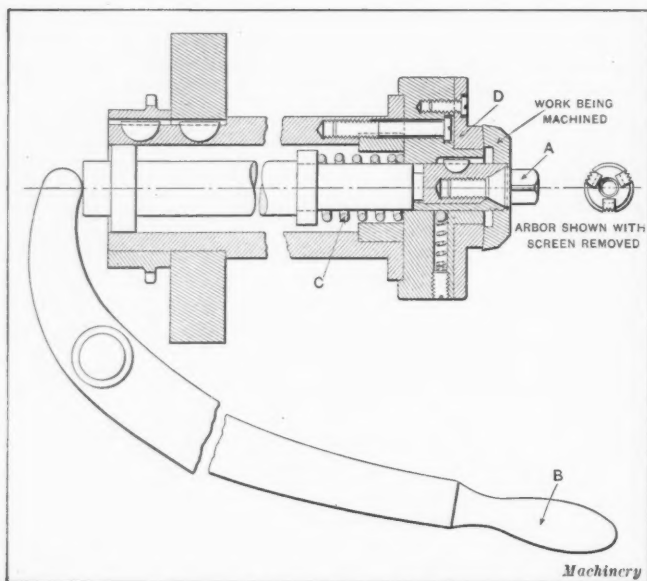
Expanding Draw-back Arbor on which Cutter Blanks are mounted
